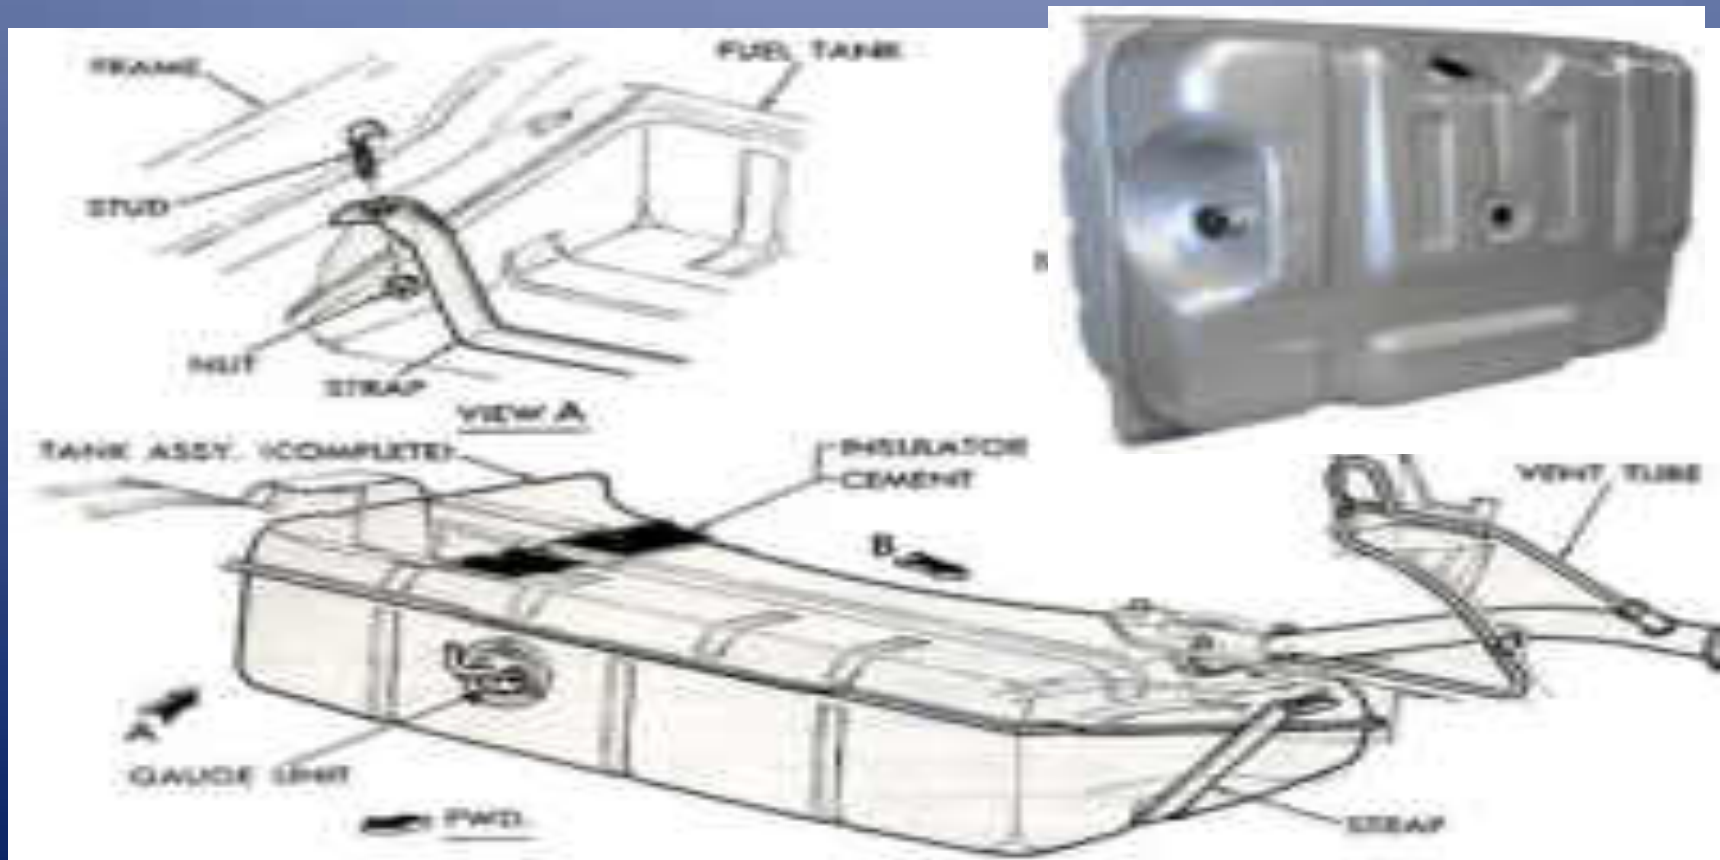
Fuel Tank Assembly Installed (131" W/B Cars)
